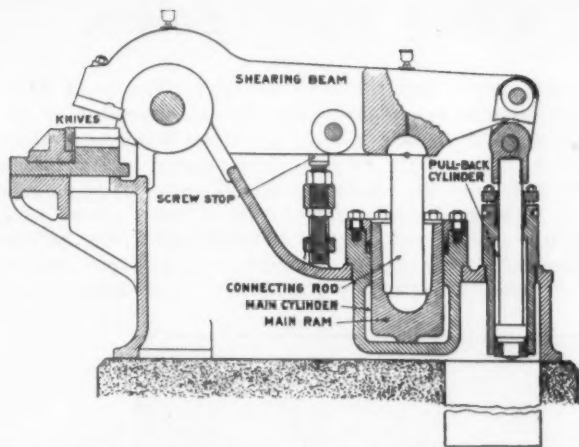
Sectional Elevation of the Watson-Stillman Hydraulic Coping Machine.
